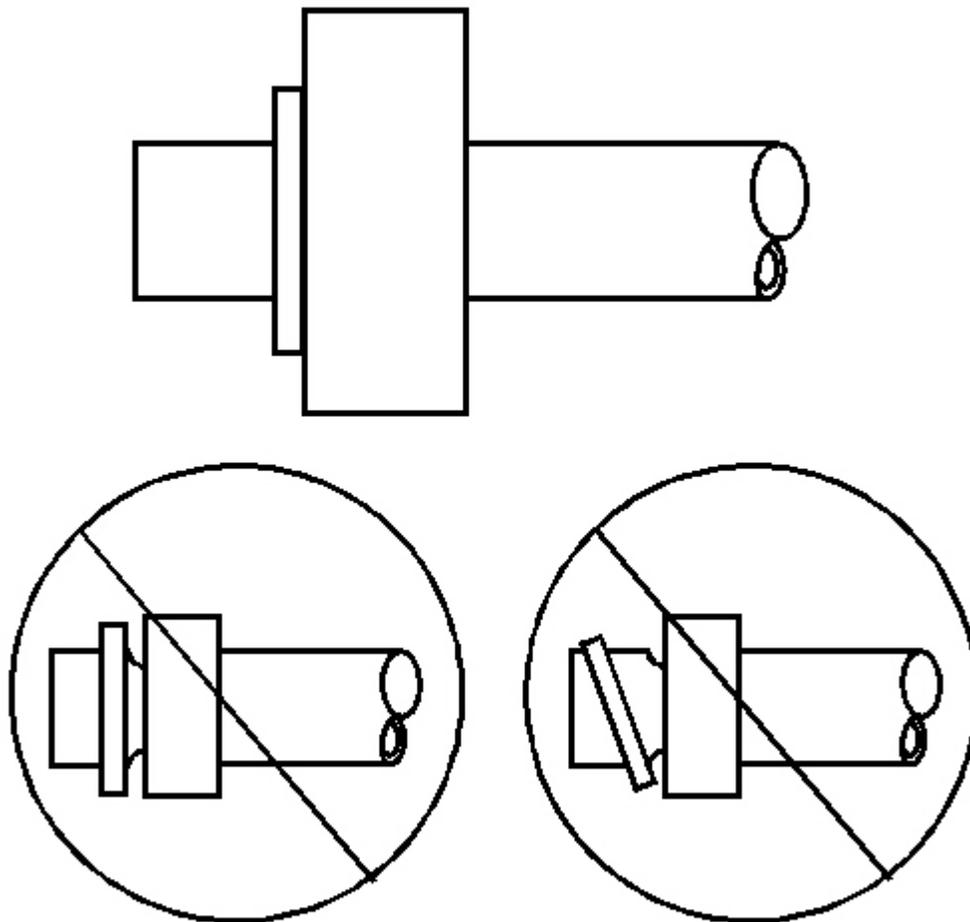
Identifying Good & Bad Sealing Washer Positions
